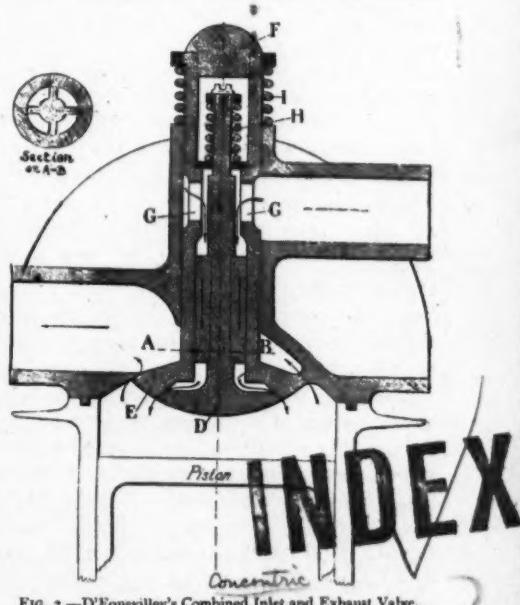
D'Equevilly's Combined Inlet and Exhaust Valve.
